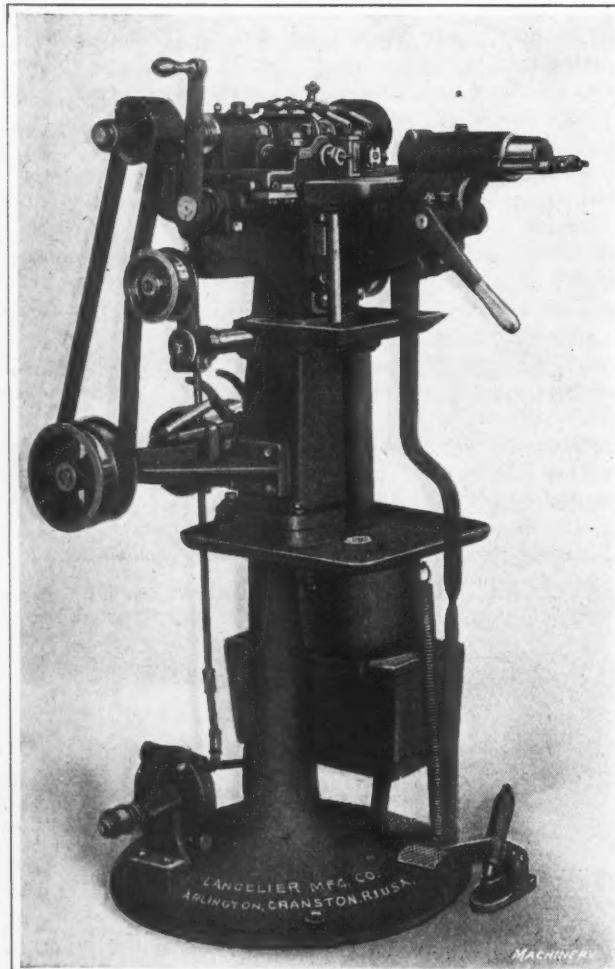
Langelier Duplex Machine for milling Wrench Slots in Shell Adapters
